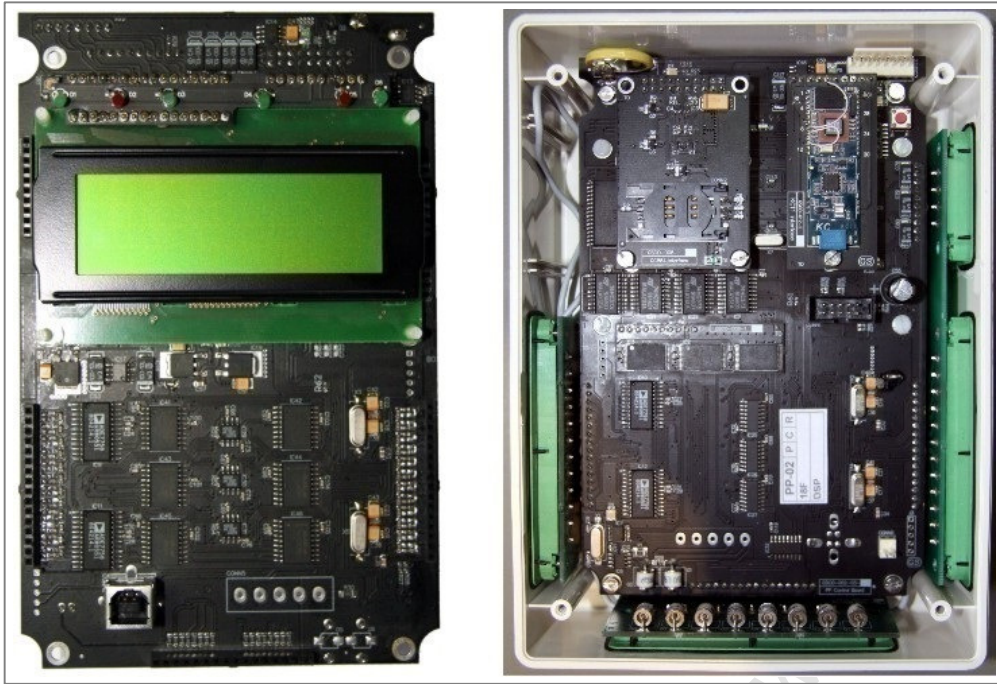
Control Board and Assembled Power Profiler Lid
